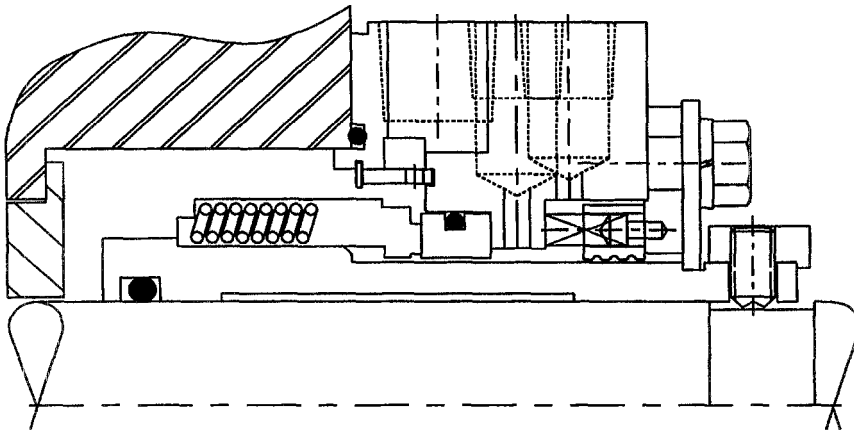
Type "A" seal. Arrangement 1—single seal.
